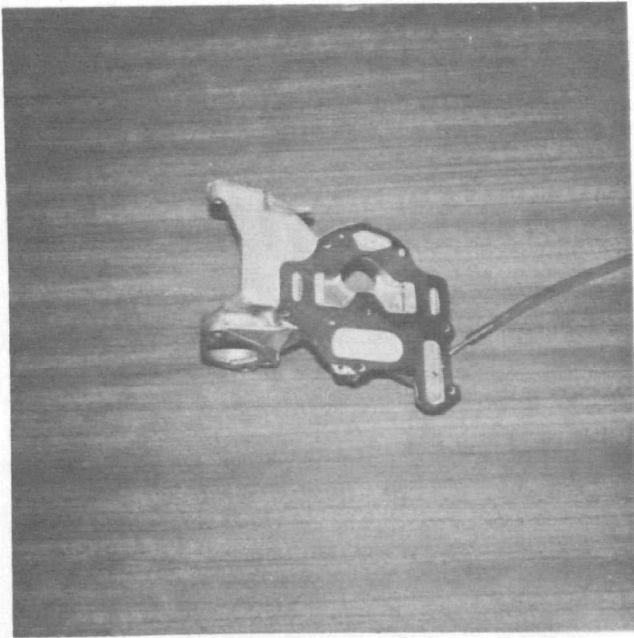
Modified inlet manifold used for tests on engine 26; inside view
